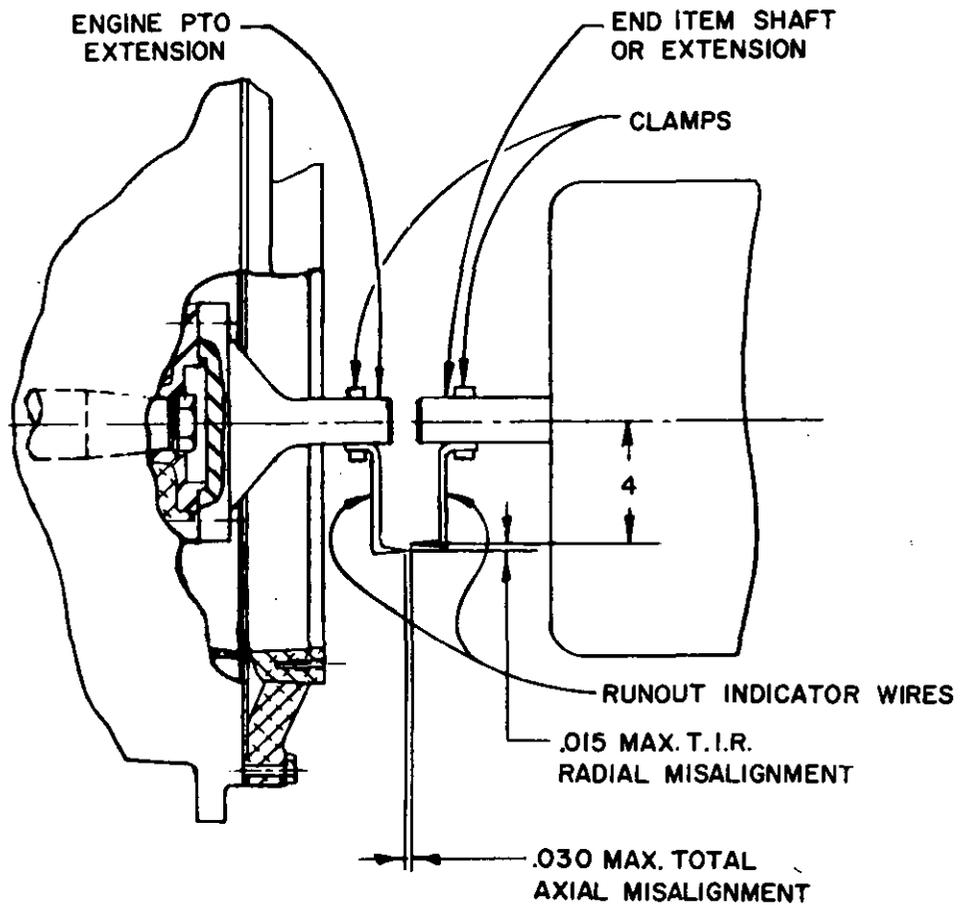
FLYWHEEL COUPLING ADAPTER
